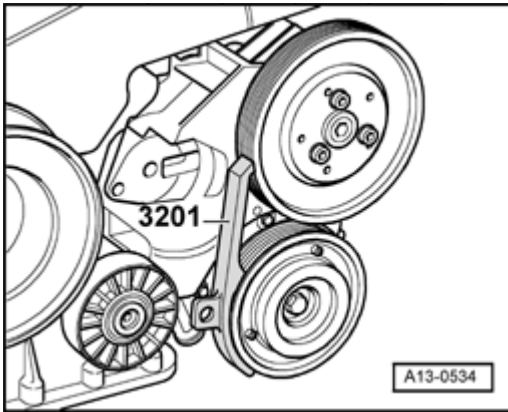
Placing Alignment Gauge 3201 On Ribbed Belt Pulley Of A/C Compressor
